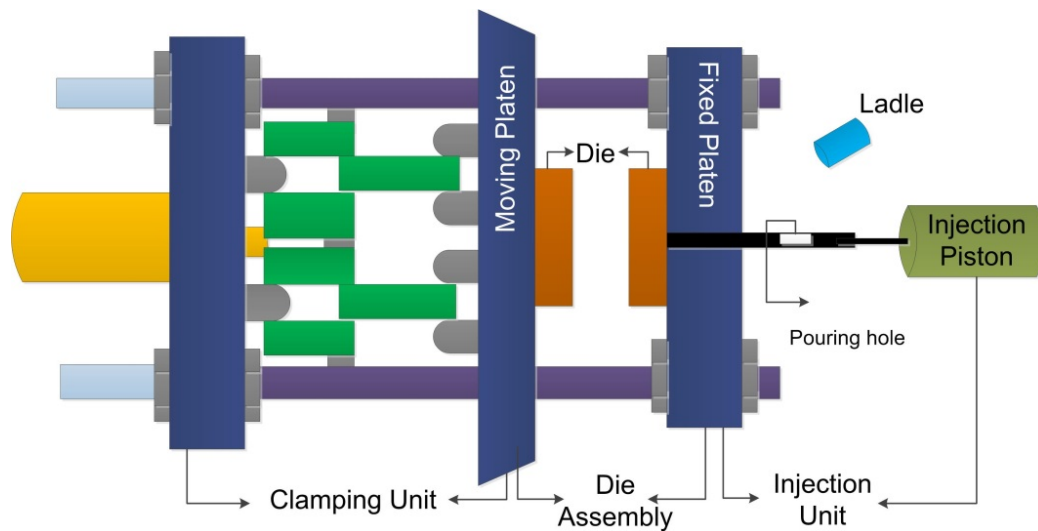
Schematic of a cold-chamber HPDC machine which consists of an injection unit, die assembly and clamping unit.
